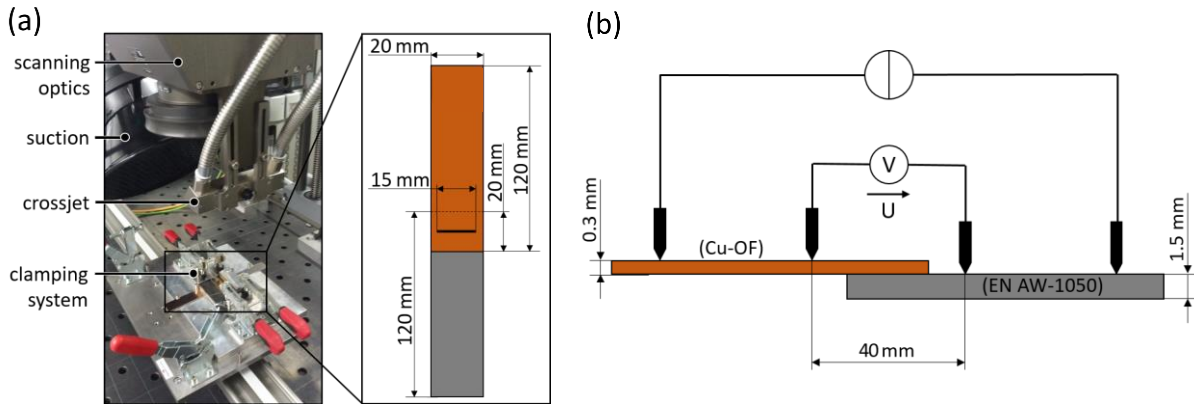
(a) The laser beam welding set-up and arrangement of the specimens and (b) the set-up for the electrical resistance measurement
